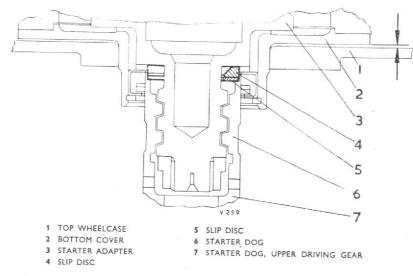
Checking the gap between the starter adapter and the top wheelcase
